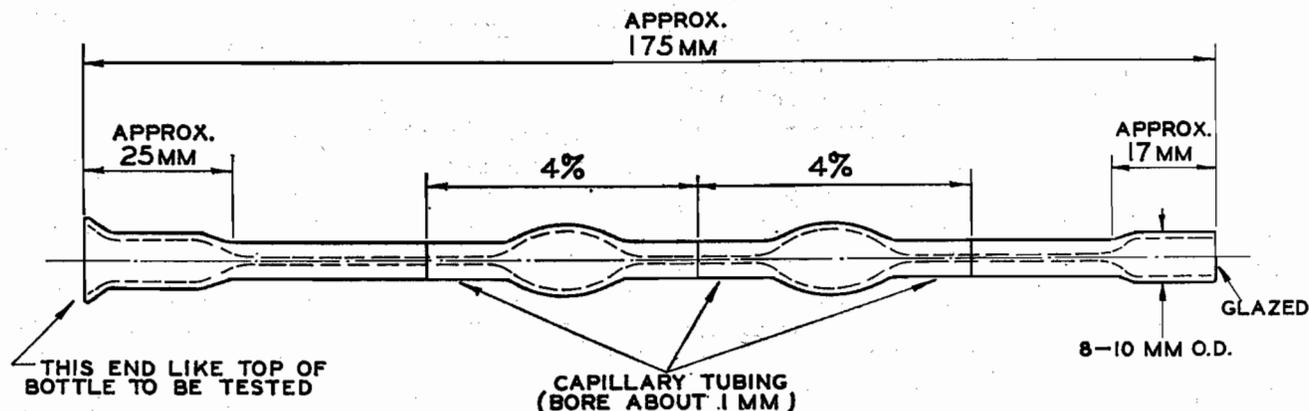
Certified Master Tube for Volume in Babcock Milk Test Bottles to be Used for Calibrating Nafis Tester. (Courtesy Drawing by Kimble Glass Company, Subsidiary Owens, Illinois)
